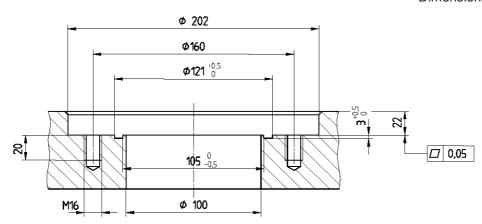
Dimensions of recess in the manlid for internal valve flange
